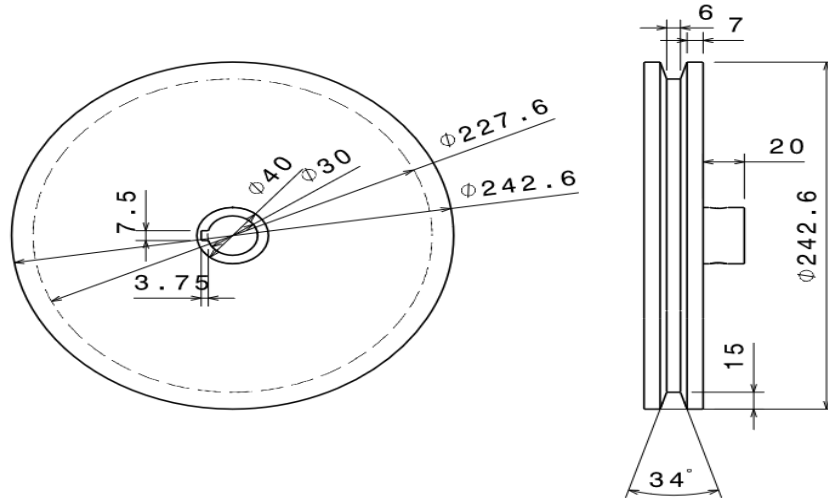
17. Screw feeder pulley geometry (all dimensions are in mm)
